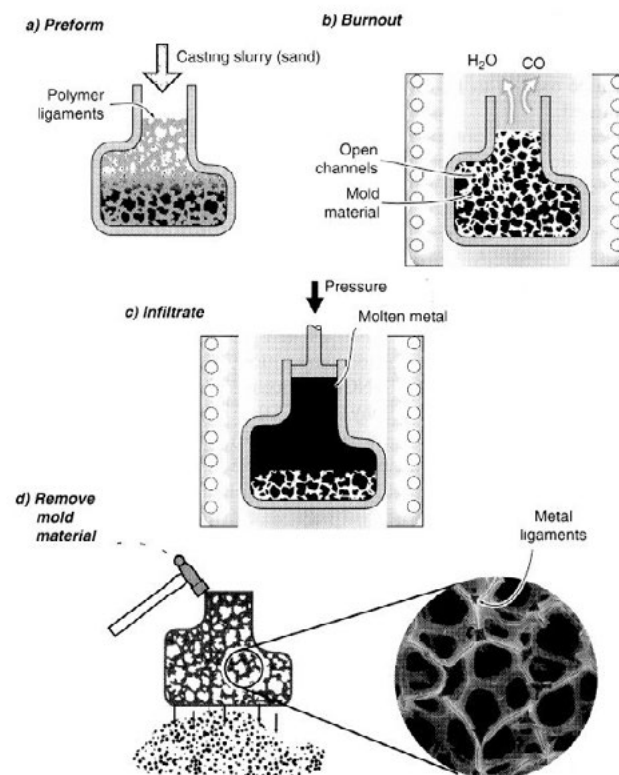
Investment casting method used to produce open cell foams(Duocel)¹²⁾.
